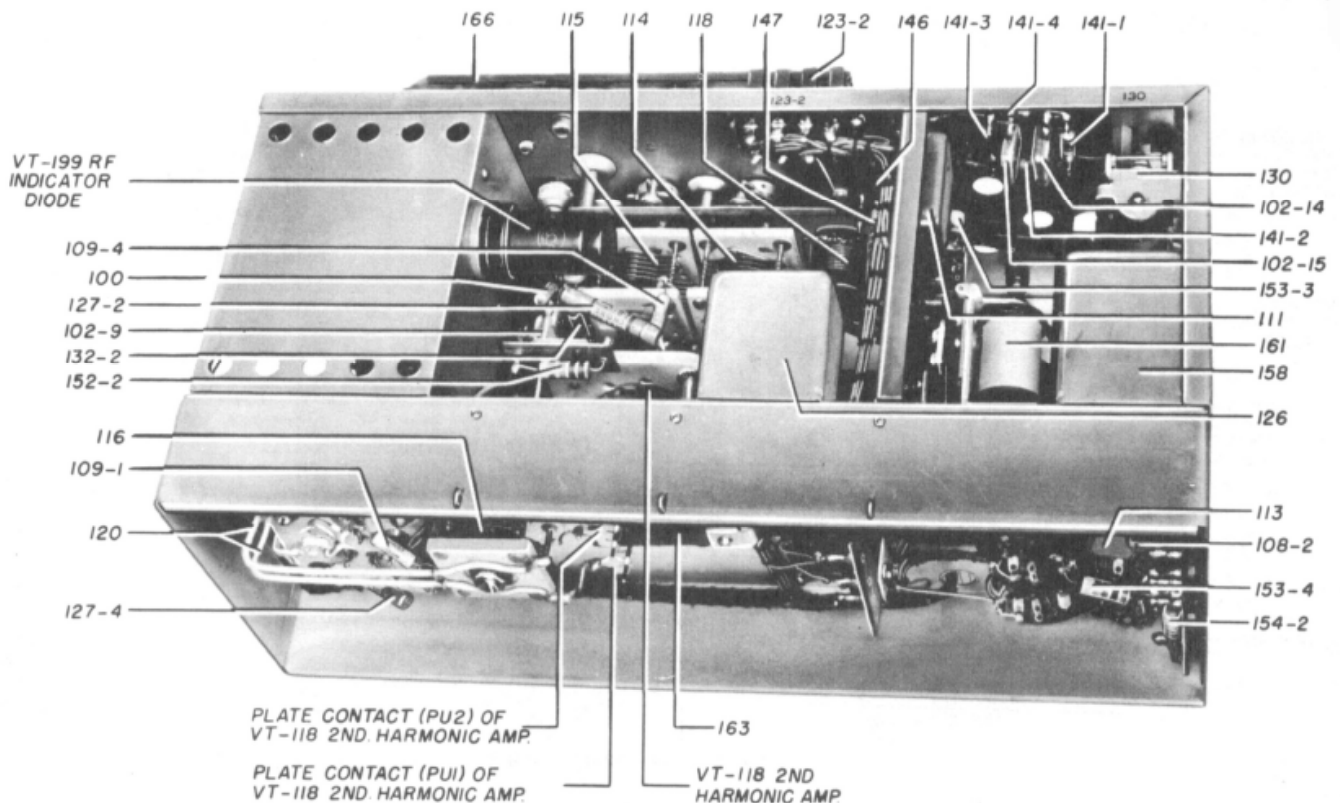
RADIO TRANSMITTER BC-625-A, BOTTOM OBLIQUE VIEW
